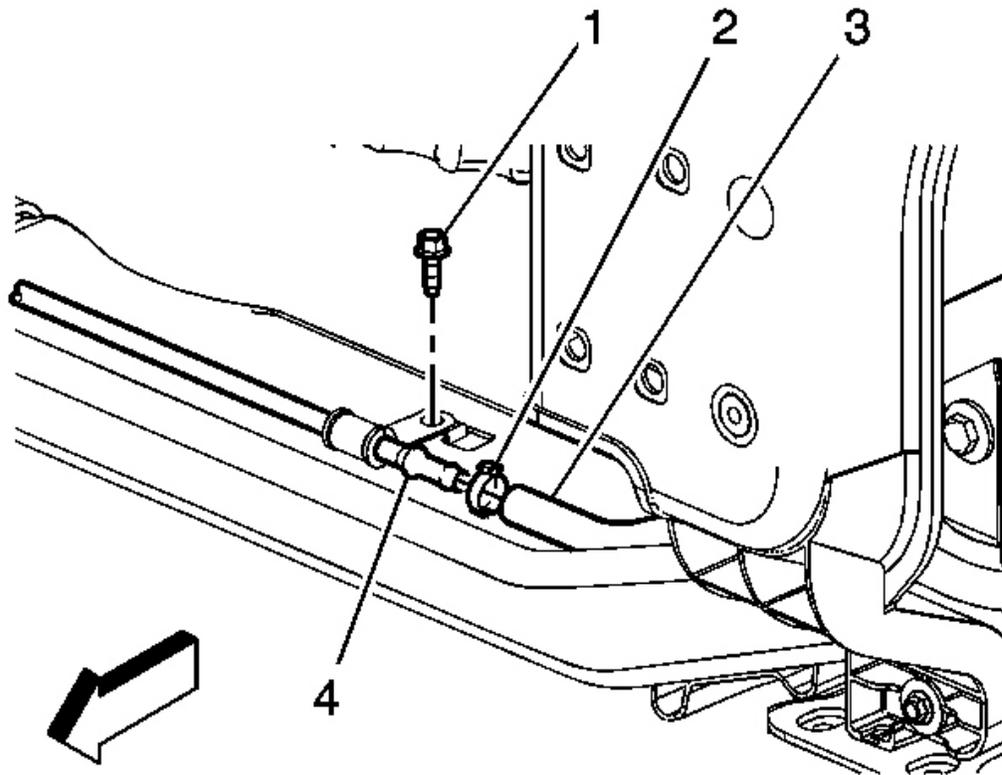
View Of Power Steering Gear Outlet Hose Bracket Bolt
